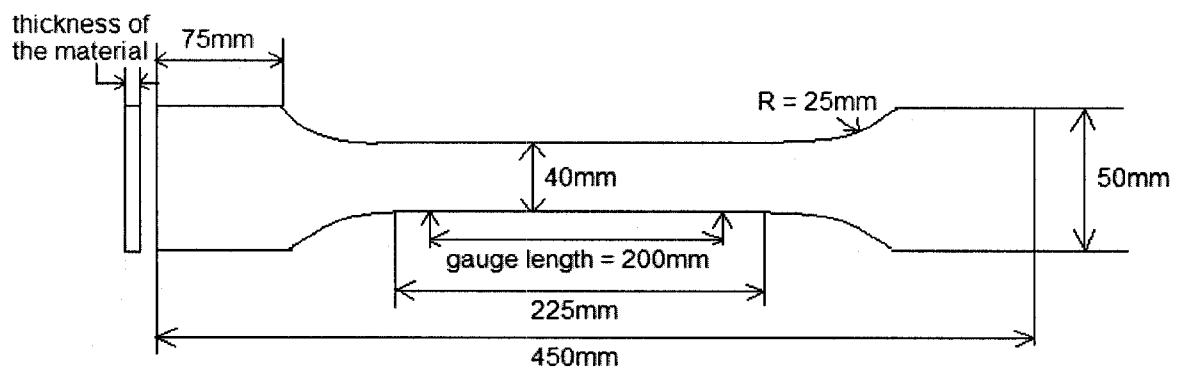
Specimen dimension for metallic materials (Plate type) – ASTM E 8M-04
